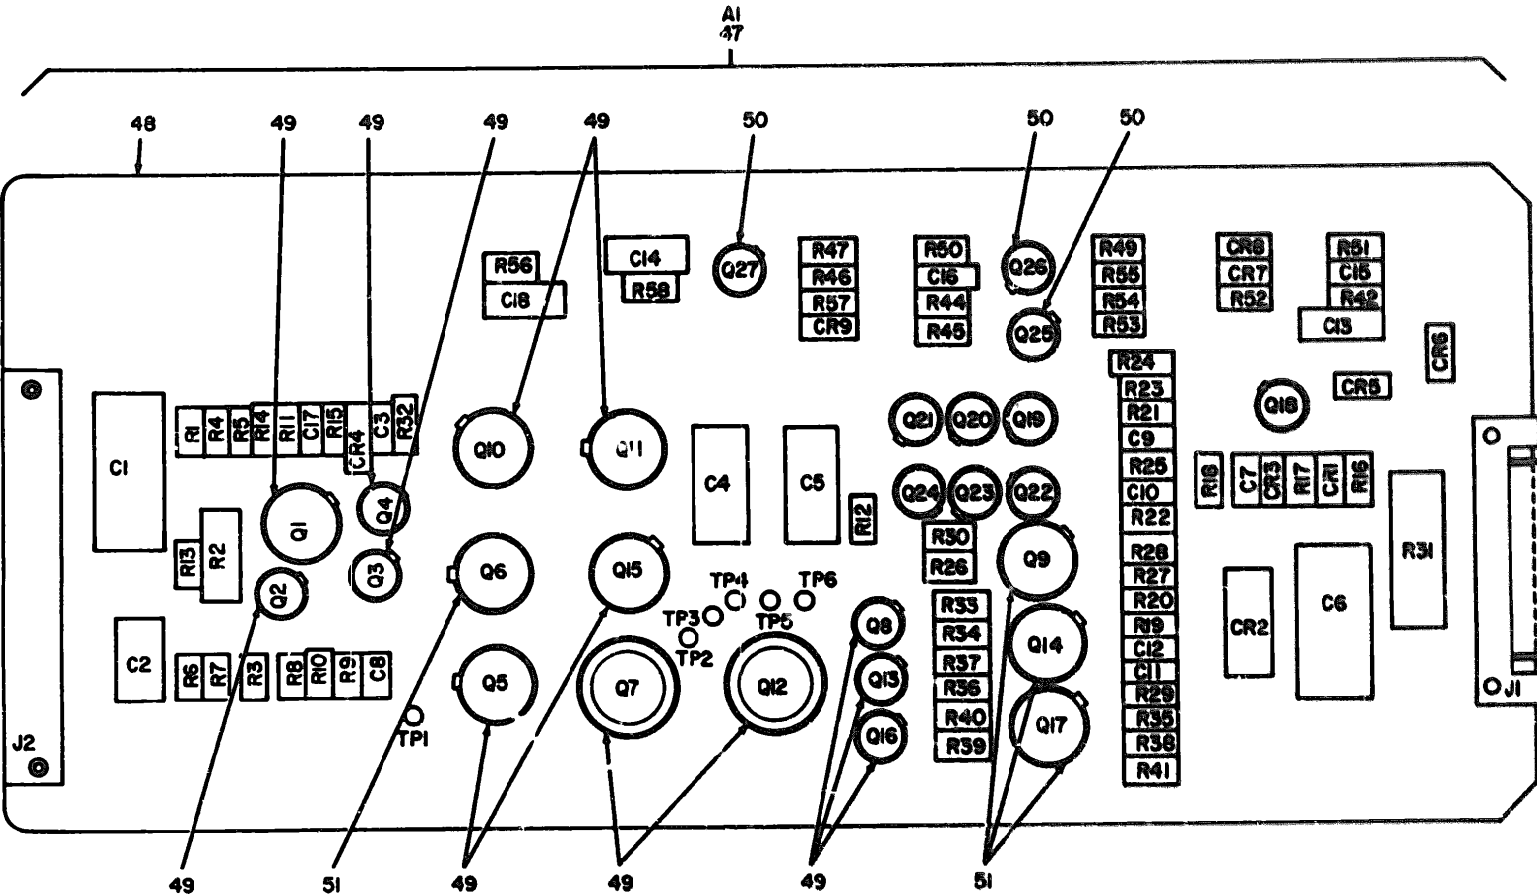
Logic Board Assembly (A1A5A2A2), (Sheet 1 of 2).
